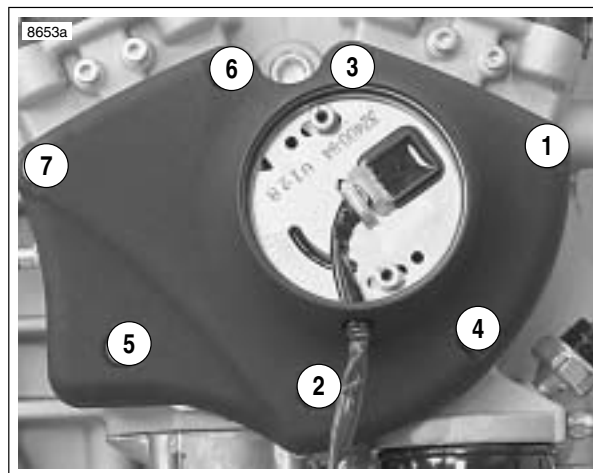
Gearcase Cover Mounting Screw Torque Sequence
